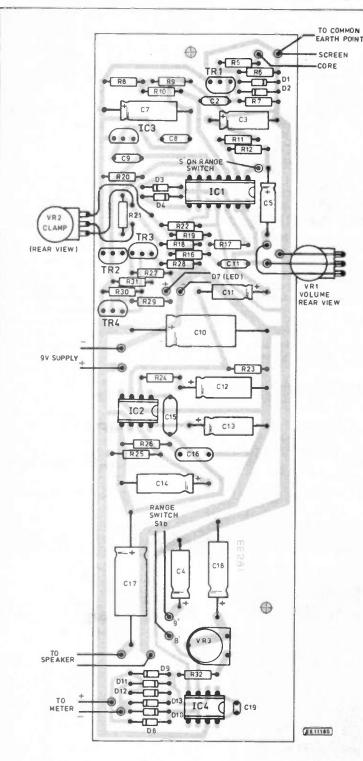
Printed circuit board component layout and wiring details for the case mounted components.
